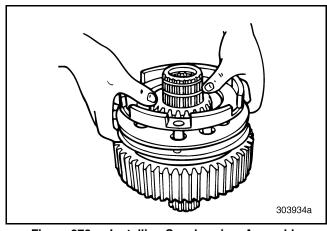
Installing Synchronizer Assembly (T313L/T318L Shown)
